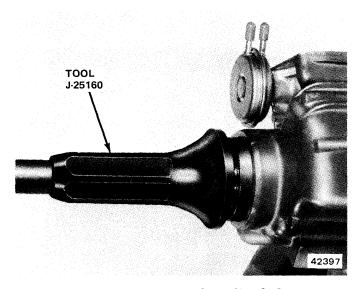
Installing Rear Output Shaft Oil Seal
